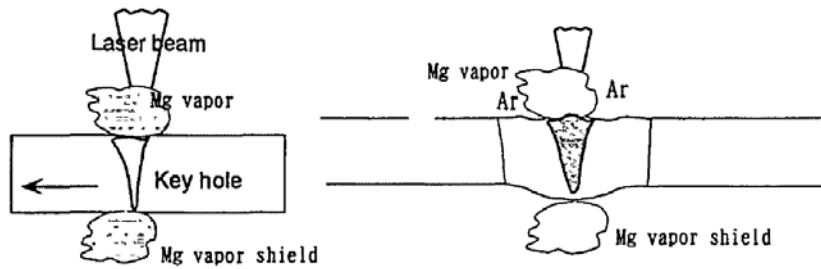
Nd:YAG laser welding, centre gas Ar, without back shielding [4]
